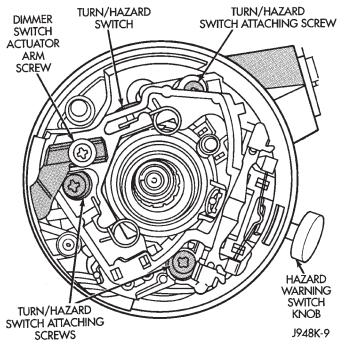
Turn/Hazard Switch And Dimmer Actuating
